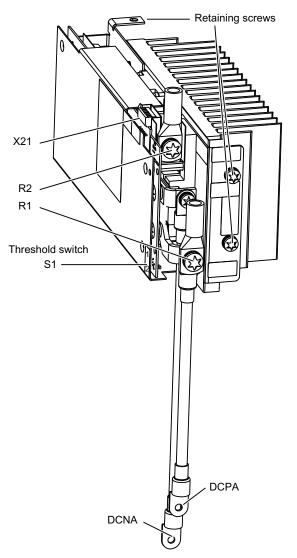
Braking Module for Active Line Module / Motor Module, frame size FX and for Basic Line Module, frame size FB
